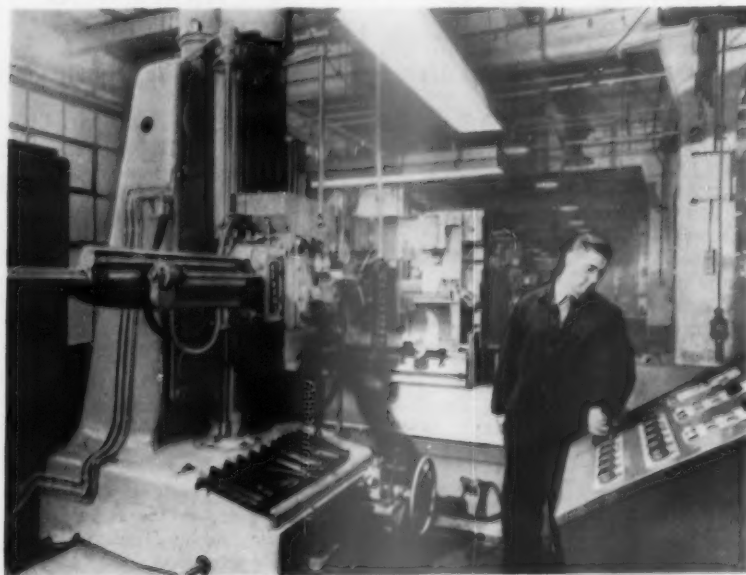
Kearns No. 0 planer table type horizontal boring machine with British Thomson-Houston controls for automatic co-ordinate setting
